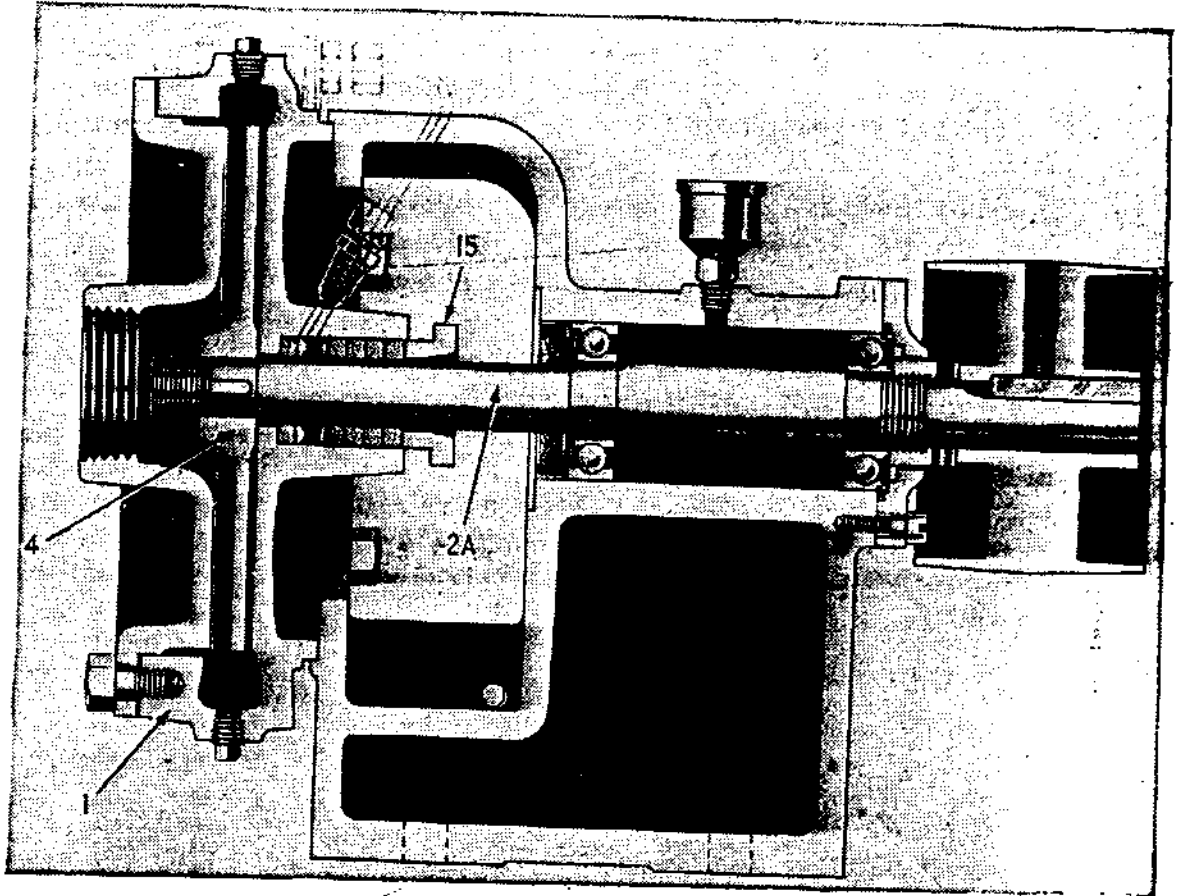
Sectional view of an open-impeller pump with parts identified by numbers (see text and table).
